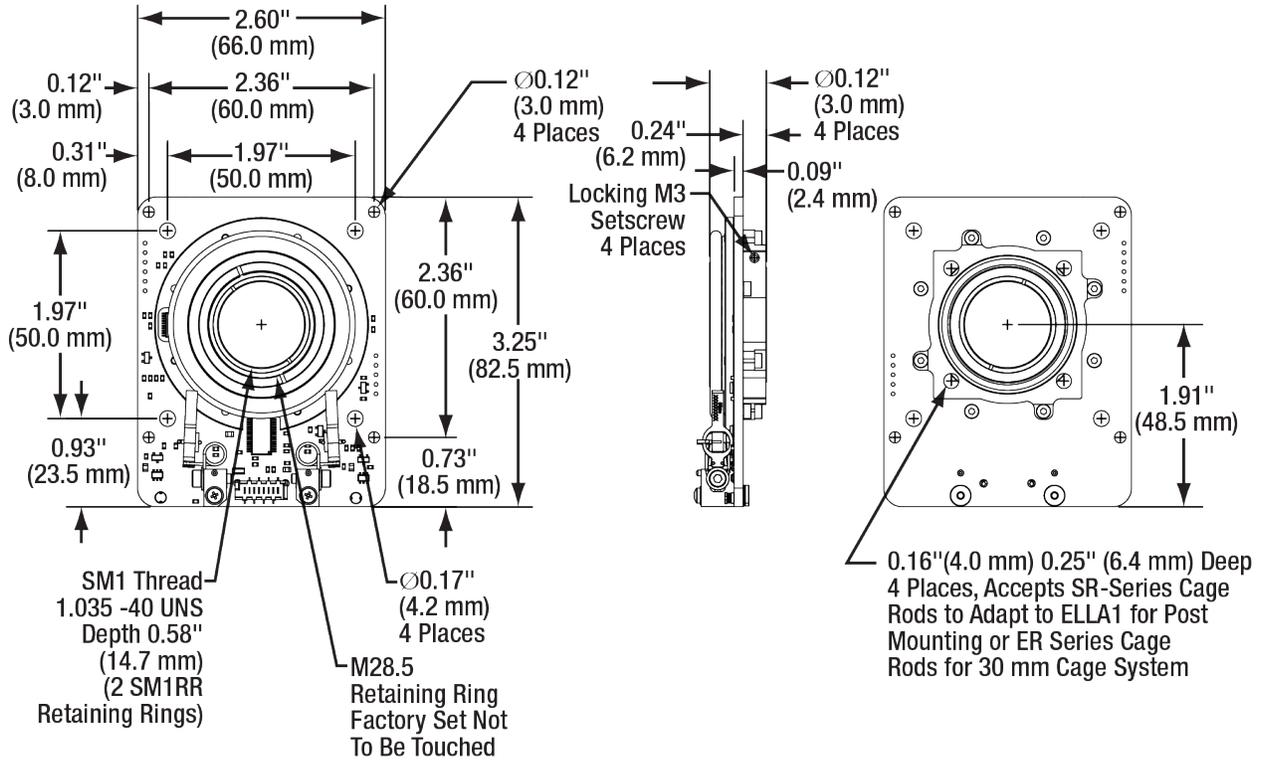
ELL14 Rotation Stage showing its 3 Possible Mounting Hole Patterns
